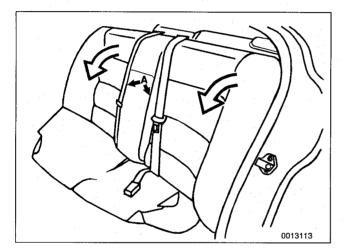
To remove rear seat, remove bottom cushion. Remove bolts(A) behind center armrest. Slide seat back up off holders, then forward.
